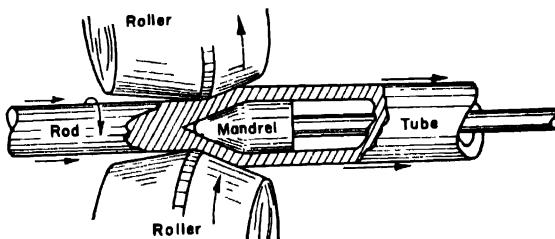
Roll-piercing seamless tubing from solid rod.
